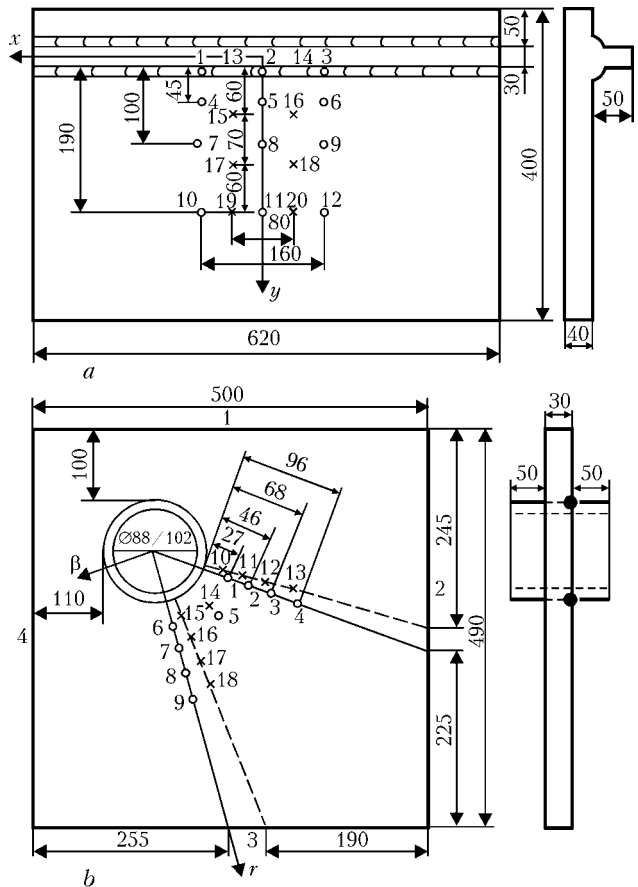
Schematic diagram of placing strain gauge rosettes in weld zone of plate with stiffening rib (a) and with welded-in pipe (b): O — rosettes on surface with weld; X — rosettes on weld-free surface
